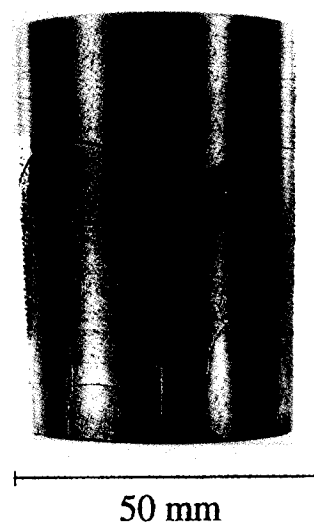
Cracking in some cylinders made by heated sprue moulding under the same conditions as that in Fig. 5. Flow lines from the axial gating system are also clearly seen in the surface.
